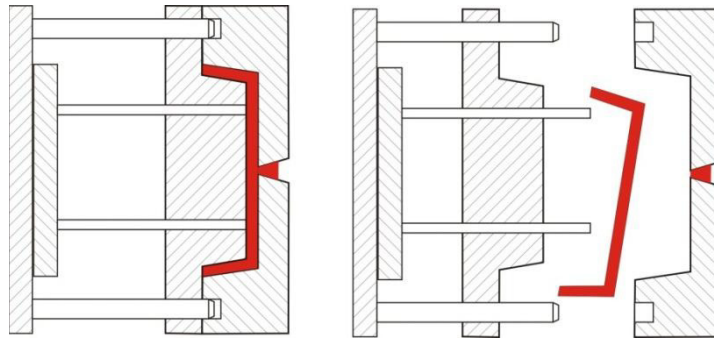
Injection mold with mechanical ejectors during cooling phase (a) and ejection process (b)
